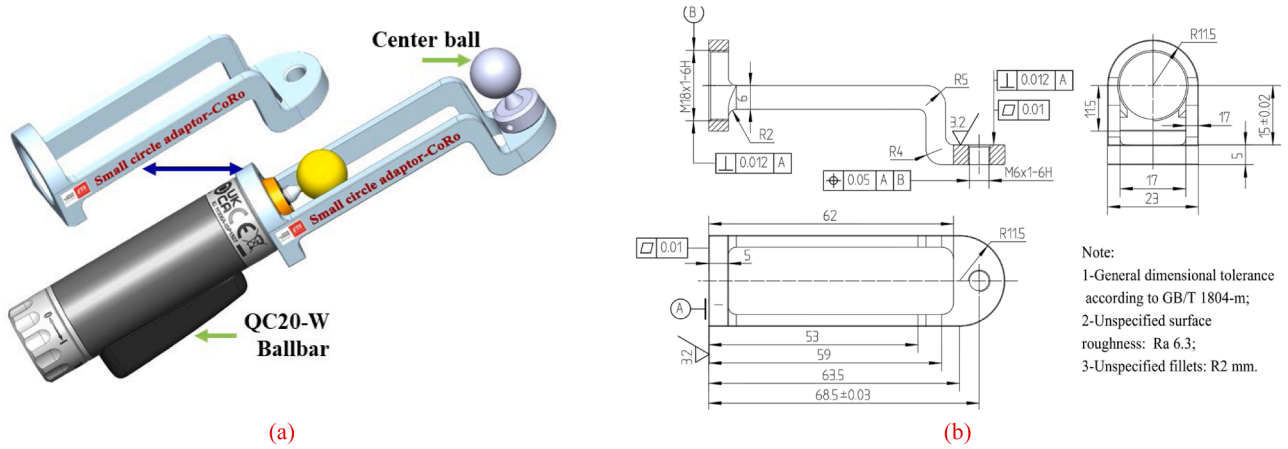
Fig. A. Improved small-circle adaptor (ISCA): (a) structural configuration assembled with the QC20-W ballbar; (b) engineering drawing showing key dimensions, tolerances, and technical notes.
